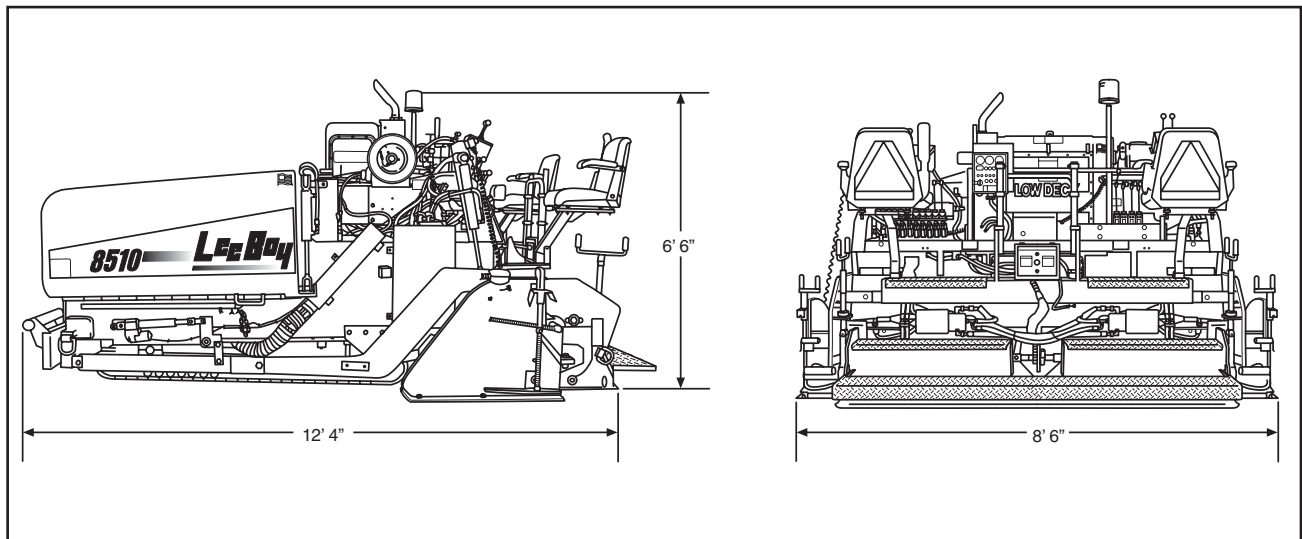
OUTLINE DIMENSIONAL DRAWING
